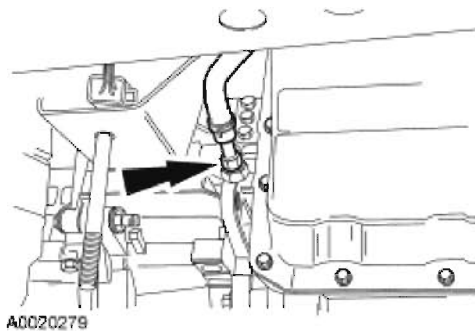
Disconnecting Turbine And Output Shaft Speed (OSS) Sensor
